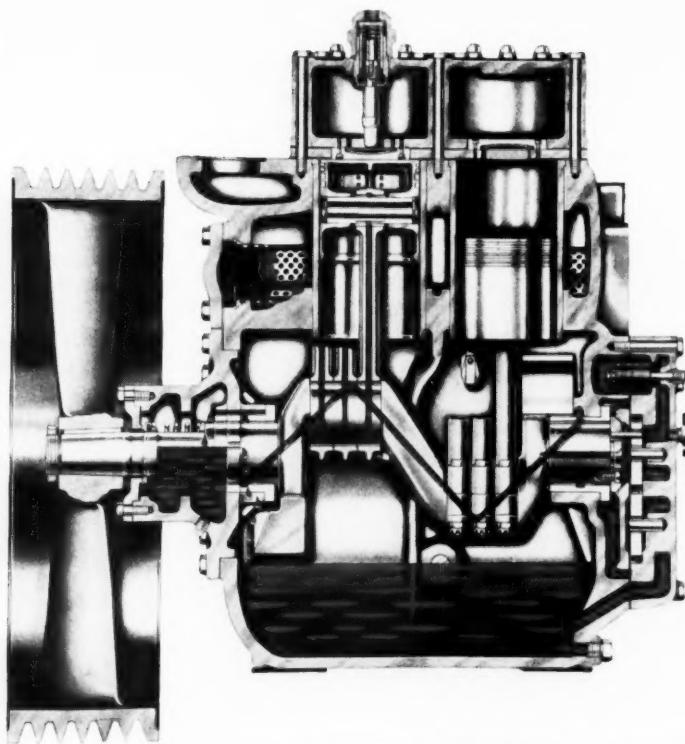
Showing the lubrication system and triple shaft seal for the Vilter "Hundred Tonner" ammonia compressor. The seal assembly is of interest. Two seals are involved; one sealing to the atmosphere, one to the crankcase. The inner sides of the seal form part of the seal chamber, also part of the oil circulating system. The mating surfaces of the seal are cooled and lubricated by oil.
